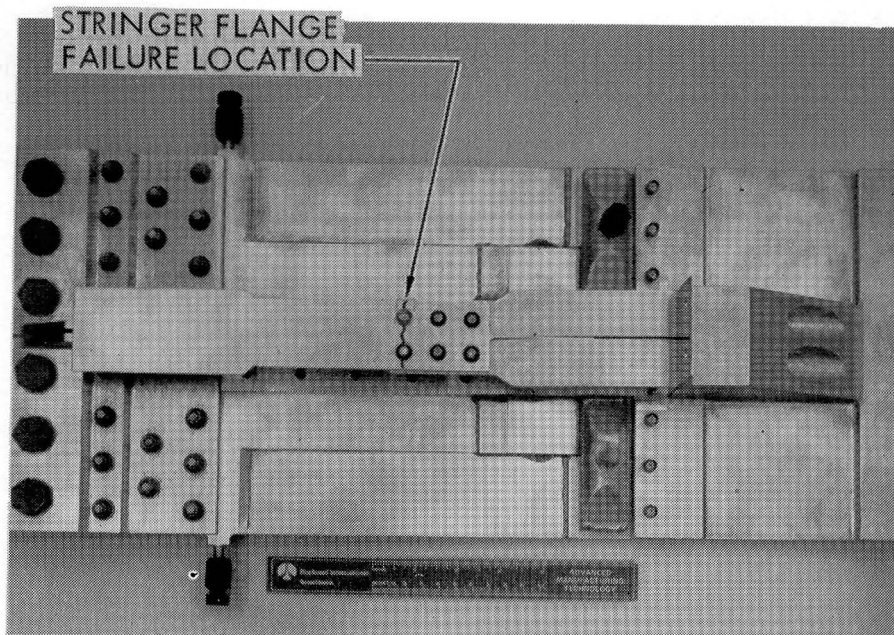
Reworked Panel Corner Specimen Edge Stringer Flange Failure Location
